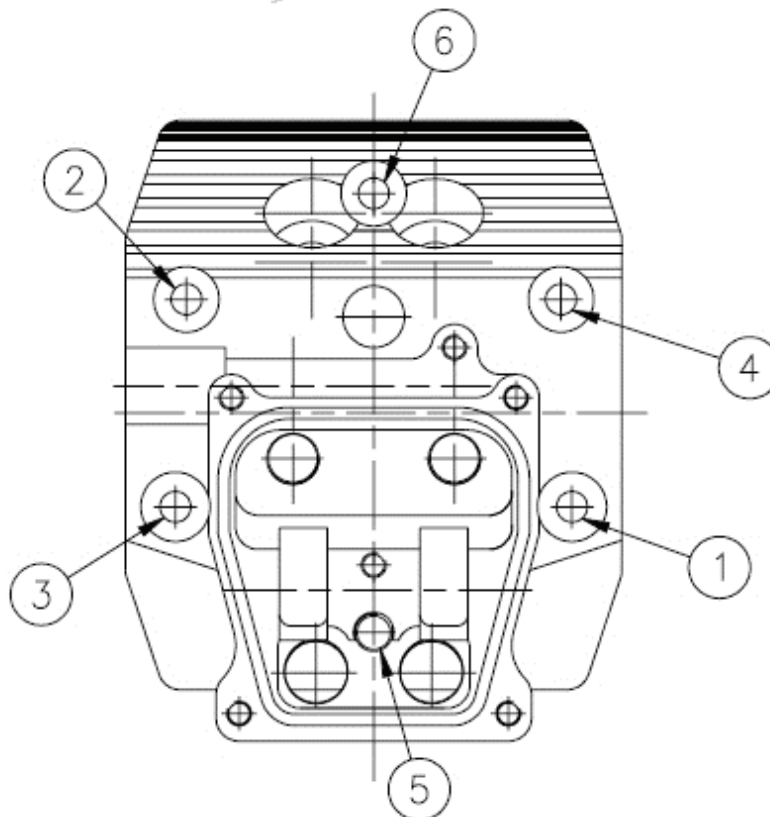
Head Bolt Locations. Number 5 is hidden behind rocker chamber oil plug.
